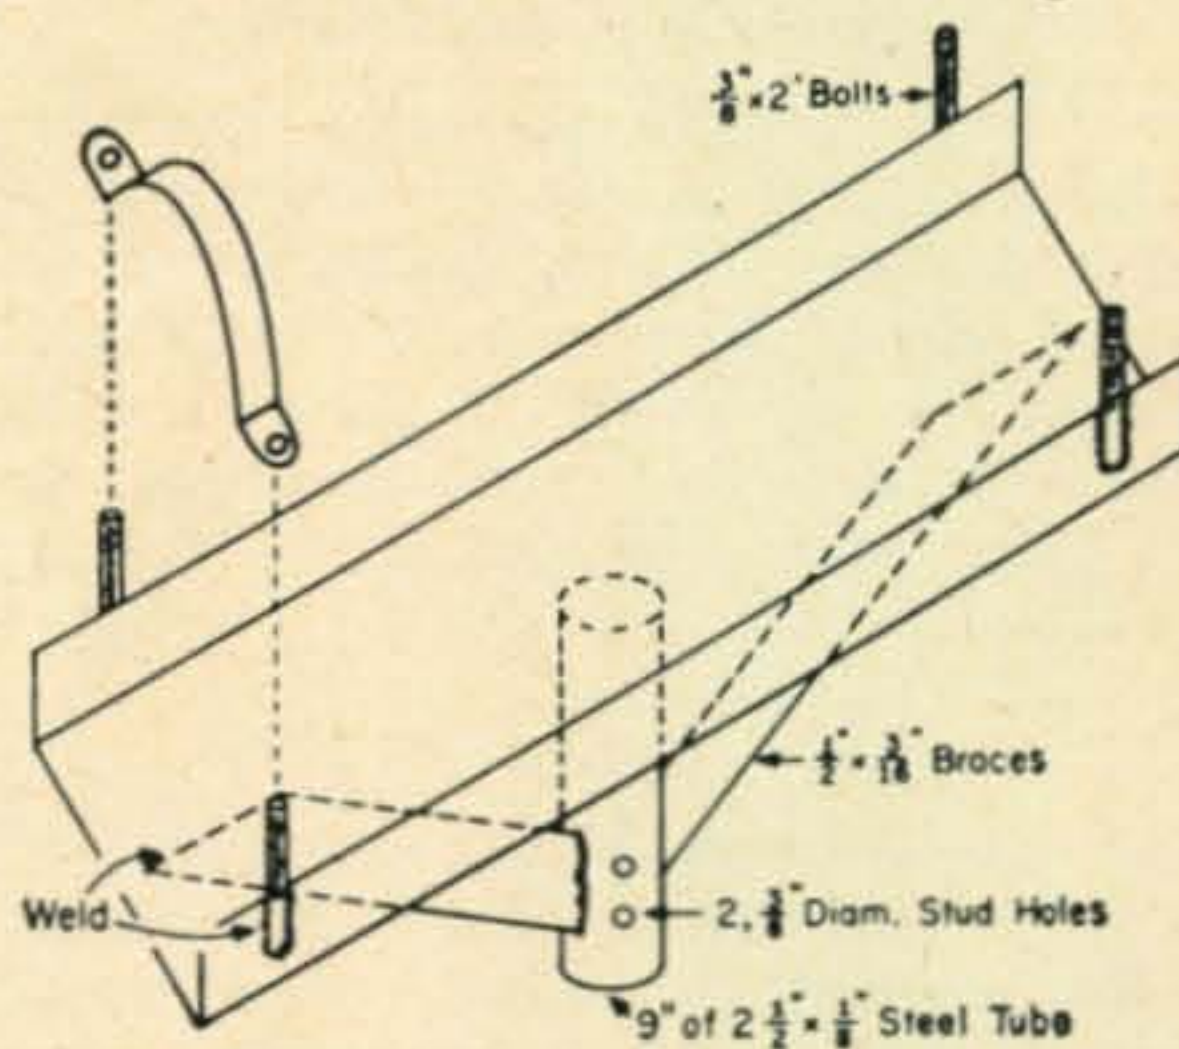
The boom mount is made of a 2 foot length of 2" x 3/16" channel with four 3/8" x 2" bolts weld as shown. The clamps are 2" x 3/16". The support pipe is braced diagonally by 1/2" x 3/16" stock.
